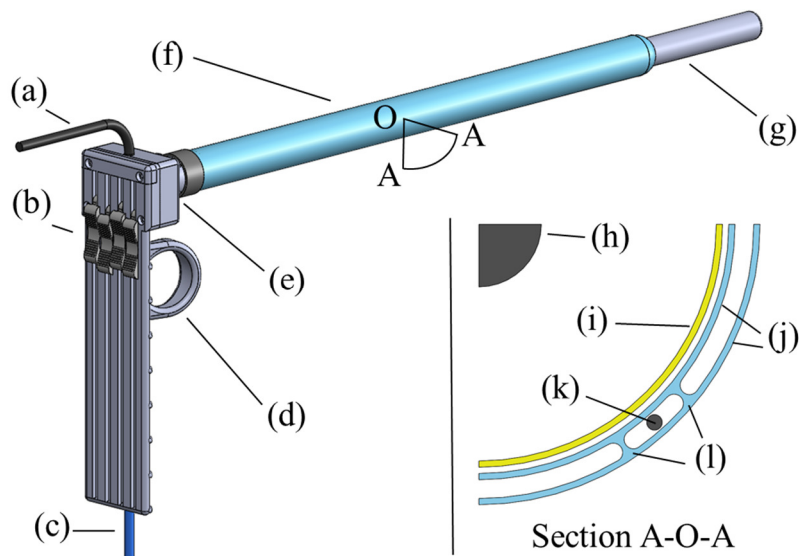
CAD drawing of the assembly of the Inflatable Endoscope with partial radial section view A-O-A: (a) USB camera cable, (b) manual tendon sliders, (c) pressure line (I/O), (d) ergonomic handle, (e) base connector, (f) fabric polyester sleeve, (g) camera housing, (h) USB camera cable section, (i) latex bladder, (j) fabric layers, (k) nylon tendon and (l) sewing lines.
